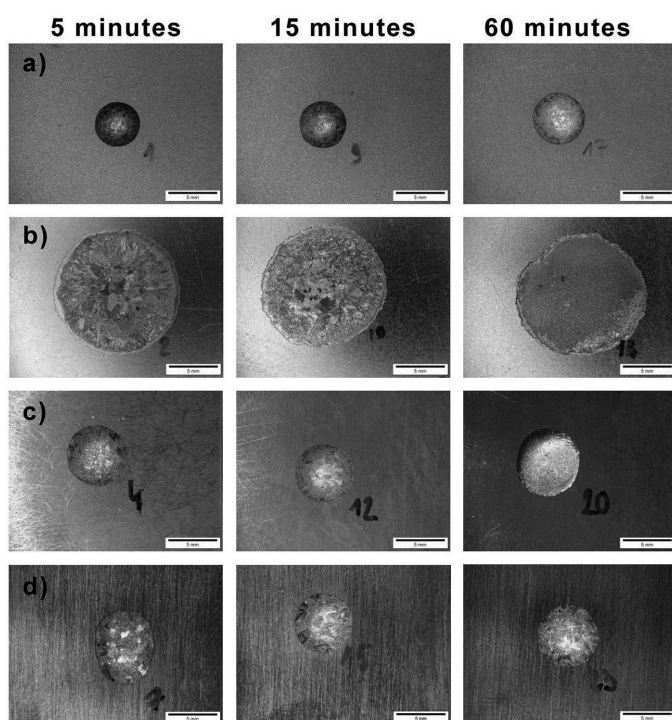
Macroscopic views of selected specimens after spreading test of BNi-3 BFM on the Inconel 718 alloy surface; a) specimens subjected to micro-blasting technology, b) specimens subjected to nickel-plating treatment, c) specimens degreased, d) specimens subjected to manually grinding by sandpaper 120; results shown for annealing time 5, 15 and 60 minutes, vacuum furnace
